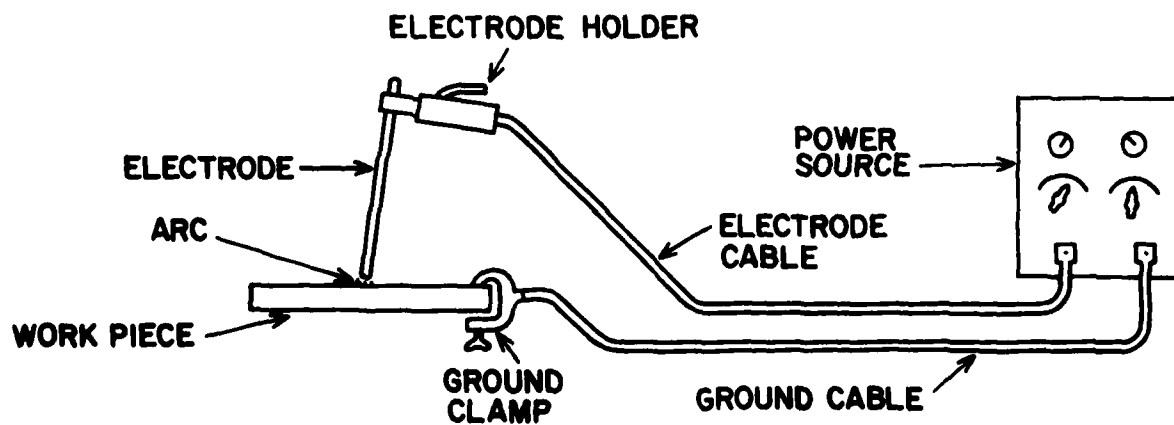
Schematic diagram of the shielded metal-arc welding process.
